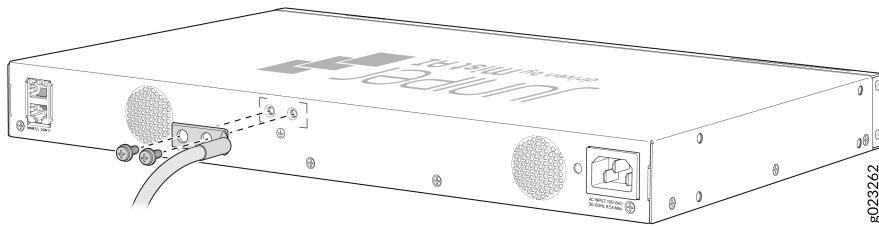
Connect a Grounding Cable to an EX4000-24T Switch
